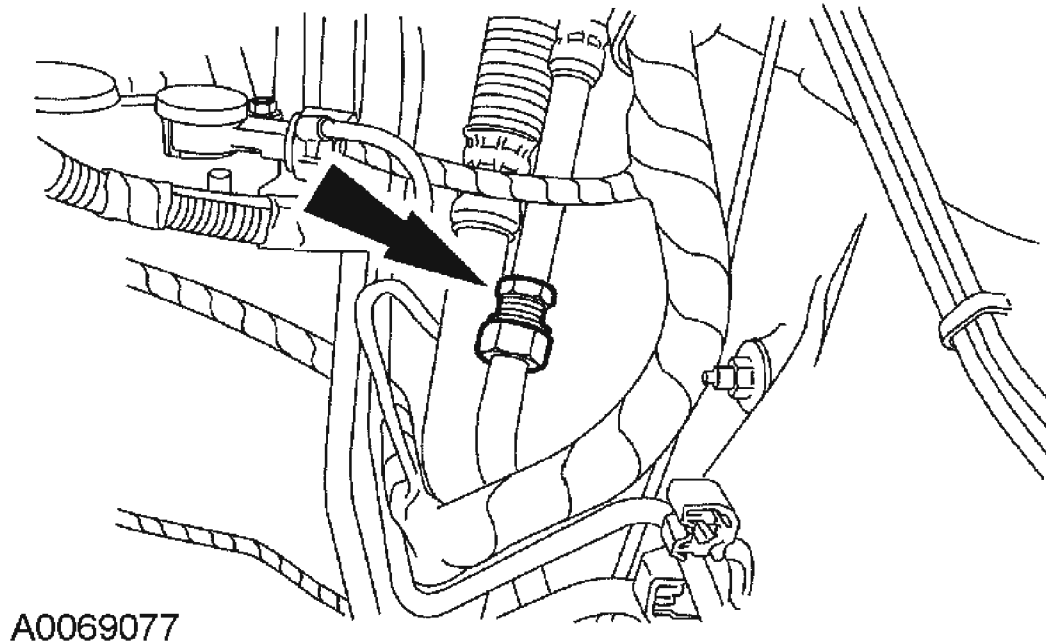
Connecting Evaporator Core Orifice Access Fitting
